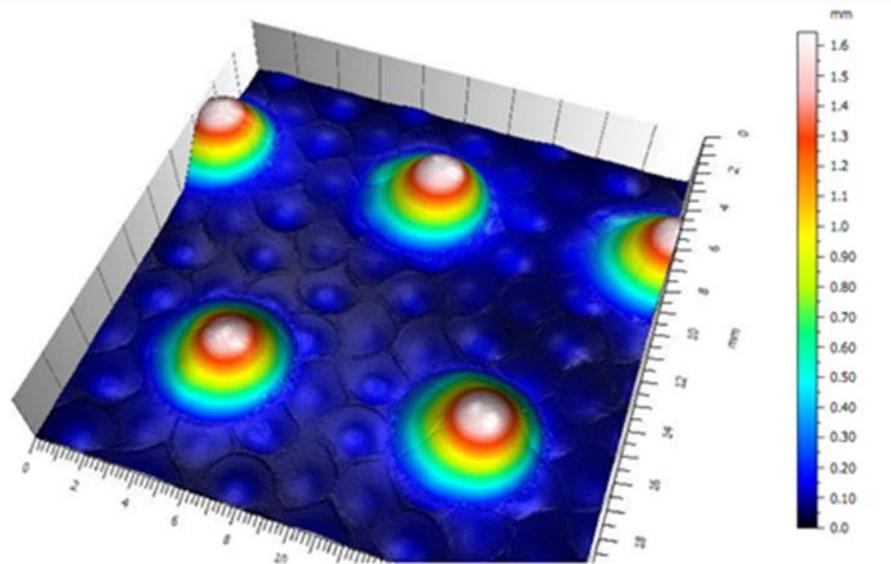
Surface Enhancement of the 1EHT tube produced using a Non-Contact Profilometer producing a false color view of the 1EHT tube (Tube Option 1)
